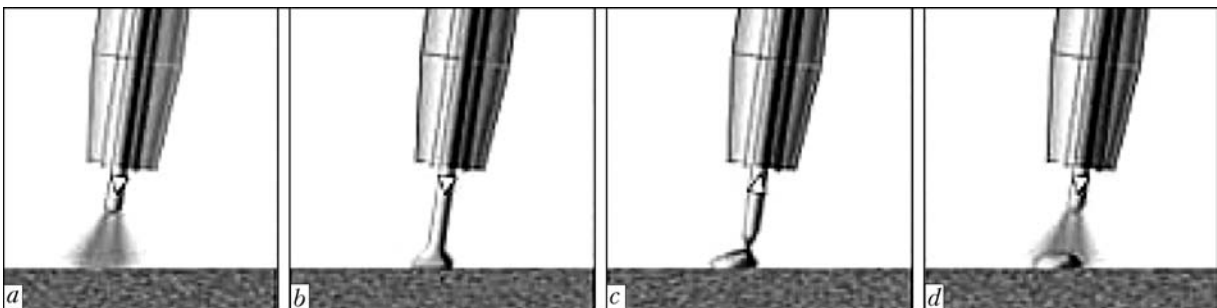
Cycle of electrode metal transfer at CMT welding: a, b, d — wire motion into arcing zone; c — reverse motion
